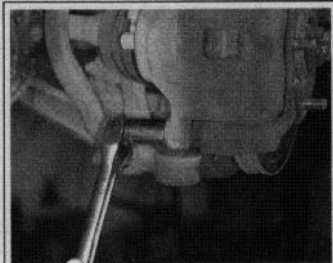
Remove the brake caliper-to-caliper support retaining bolts
